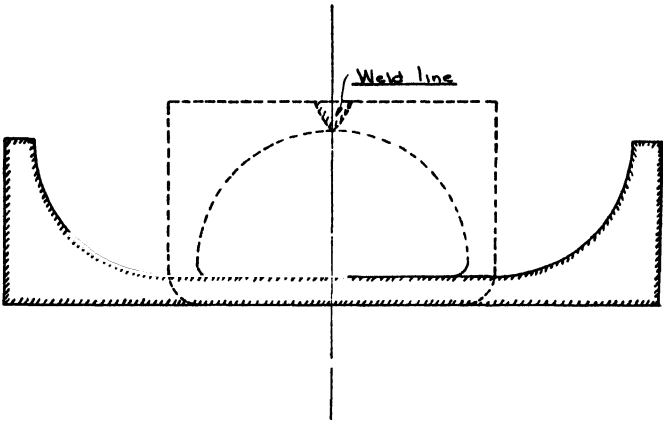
Rolled channel blank for forming economizer and superheater headers.
